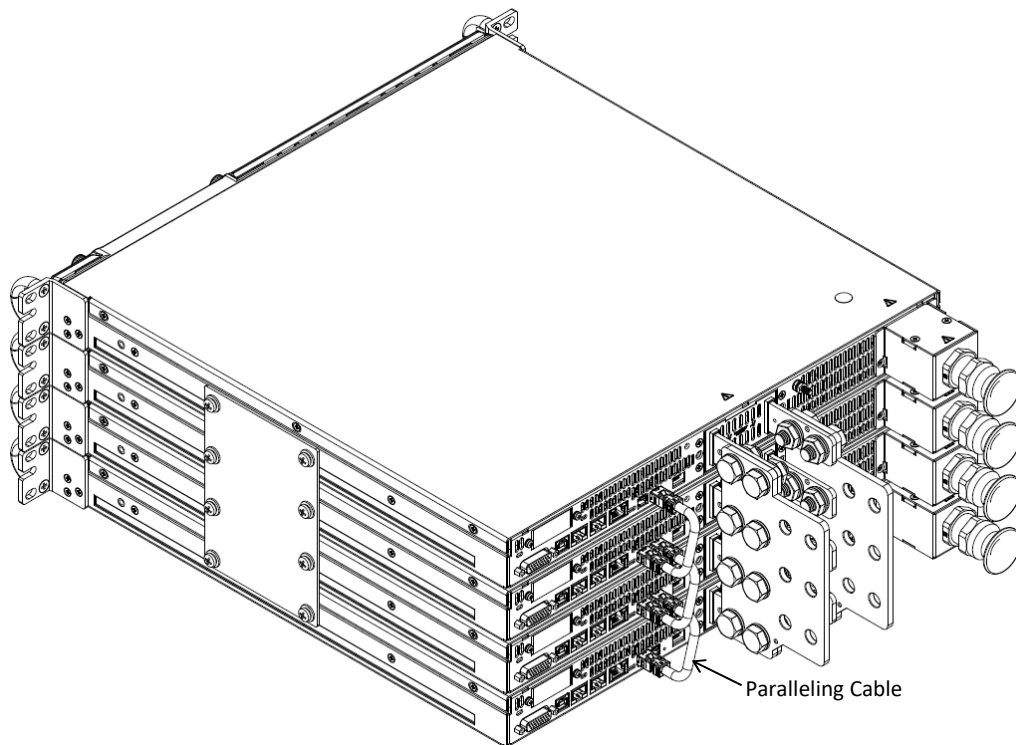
Four 10V÷40V Units Connection Plates 4U Assembly
